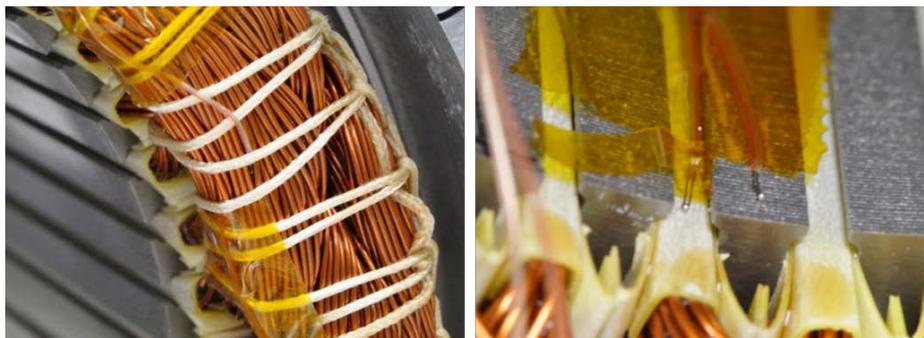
Pictures show the thermocouple placements on the end-windings (left) and stator surfaces (right).
